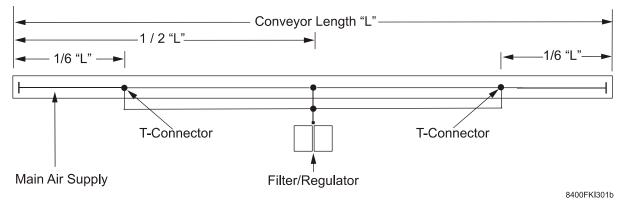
Installing a Single Filter/Regulator Unit (Code B)
